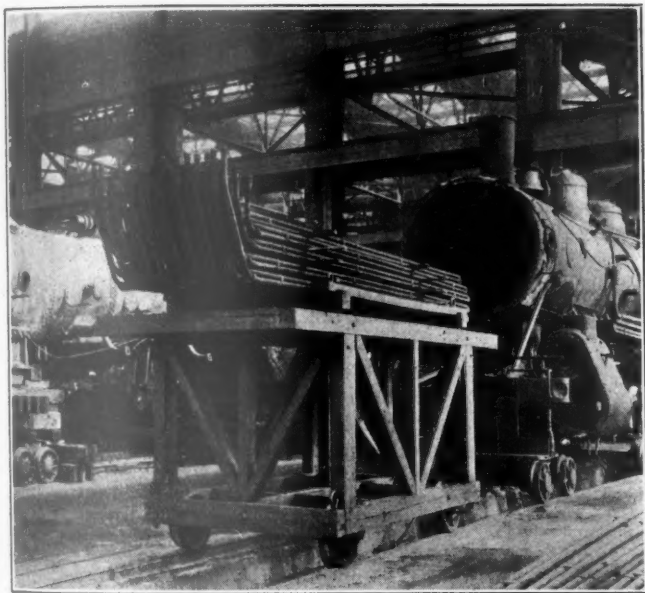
A Platform Truck Facilitates Removal of Superheater Units
